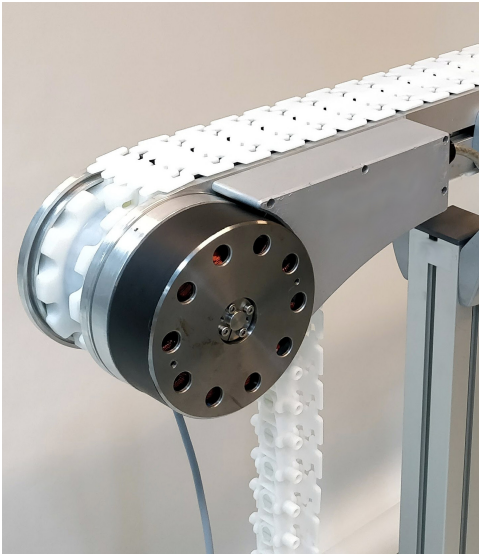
Demonstrator assembled and mount to the test track. Chain is partly removed to reveal the sprocket.
